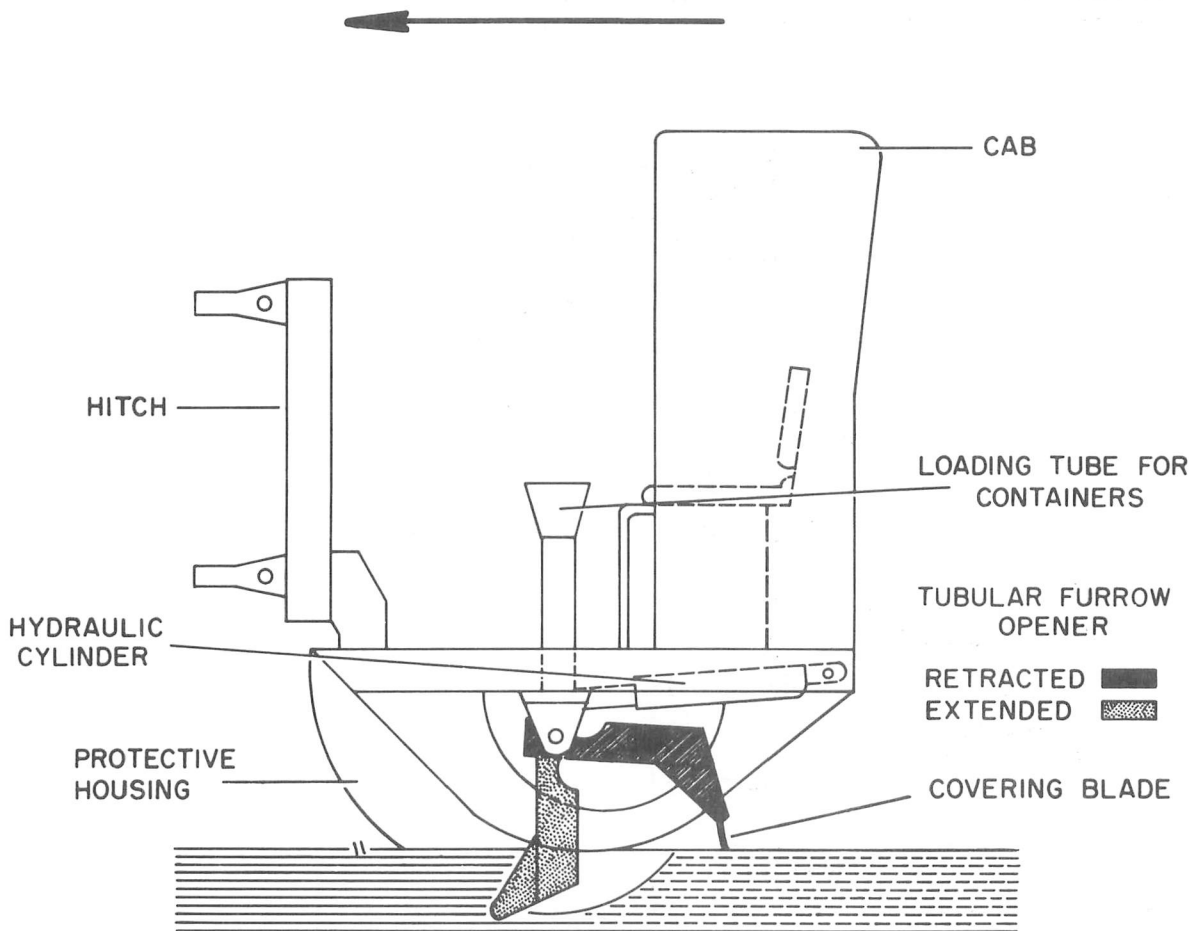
Working principle of the Soviet Druzba planter for container stock.
